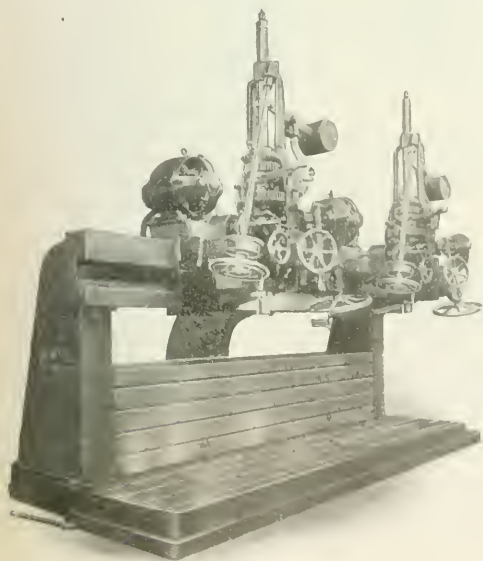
Front View of Newton Locomotive Frame Drilling Machine, with Work-tables run back to expose Floor Plate
